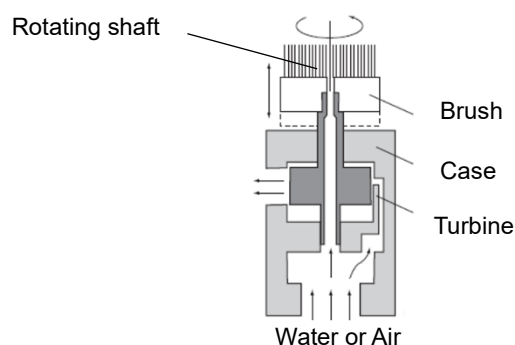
Bearing used for the rotating shaft sliding part of the sensor cleaning brush
